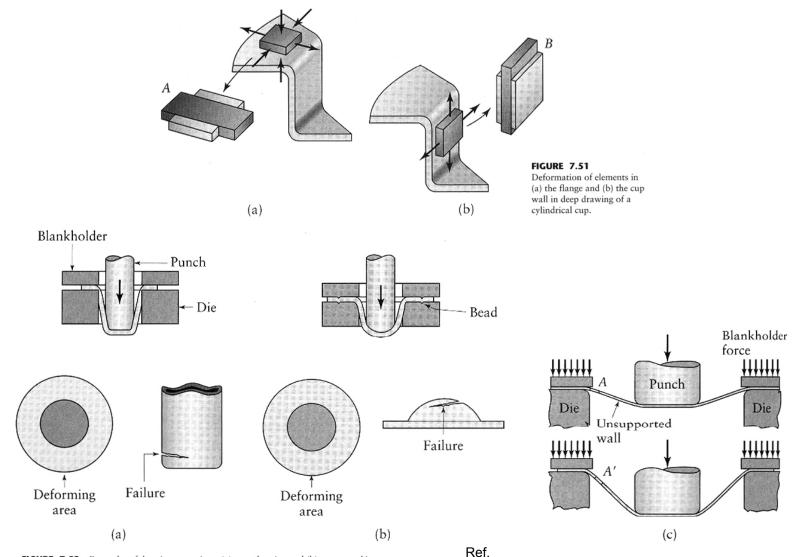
Examples of drawing operations: (a) pure drawing and (b) pure stretching. The bead prevents the sheet metal from flowing freely into the die cavity. (c) Possibility of wrinkling in the unsupported region of a sheet in drawing. *Source*: After W. F. Hosford and R. M. Caddell.
